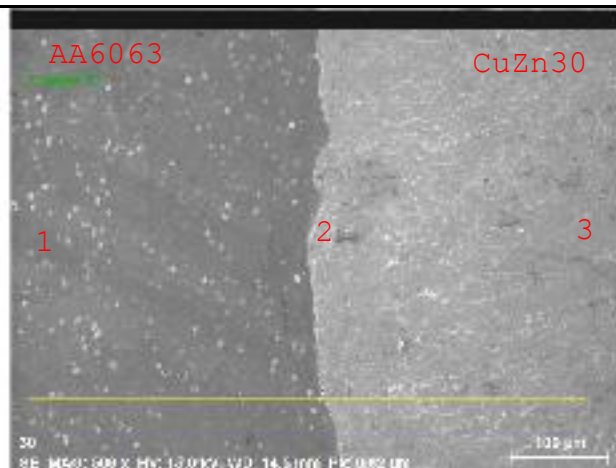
EDS analyses across the welding interface of the friction-welded specimen N6
